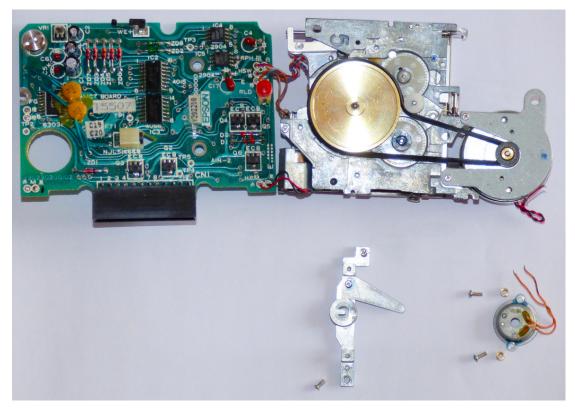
The PCB can be unfolded after unsoldering motor and tachometer cap wires and after removing the bar across the large drive wheel and the tachometer cap. The new belt has already been installed
